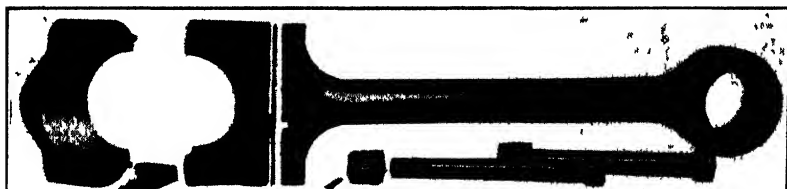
Connecting rod used on Fairbanks, Morse engines.
